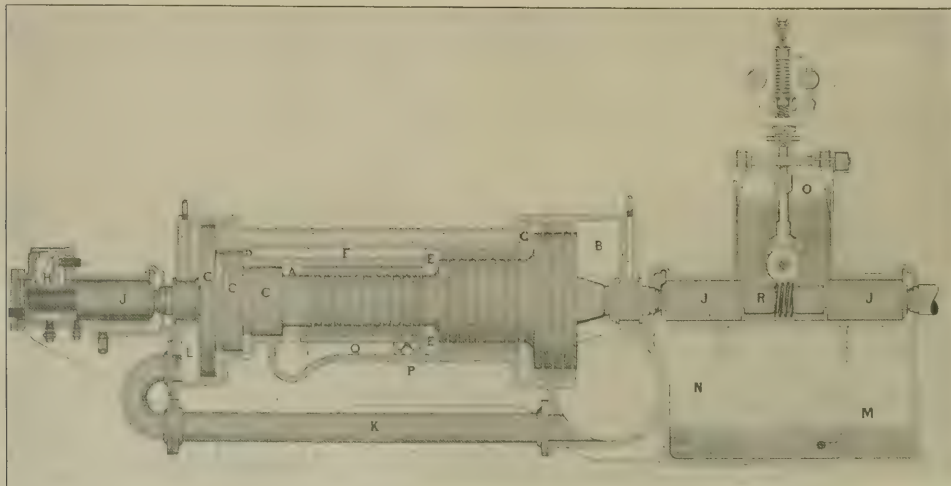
SECTION OF WESTINGHOUSE-PARSONS STEAM TURBINE.
